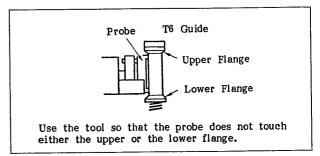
Precautions on the Usage of the Guide T6 Zenith Check Tool
